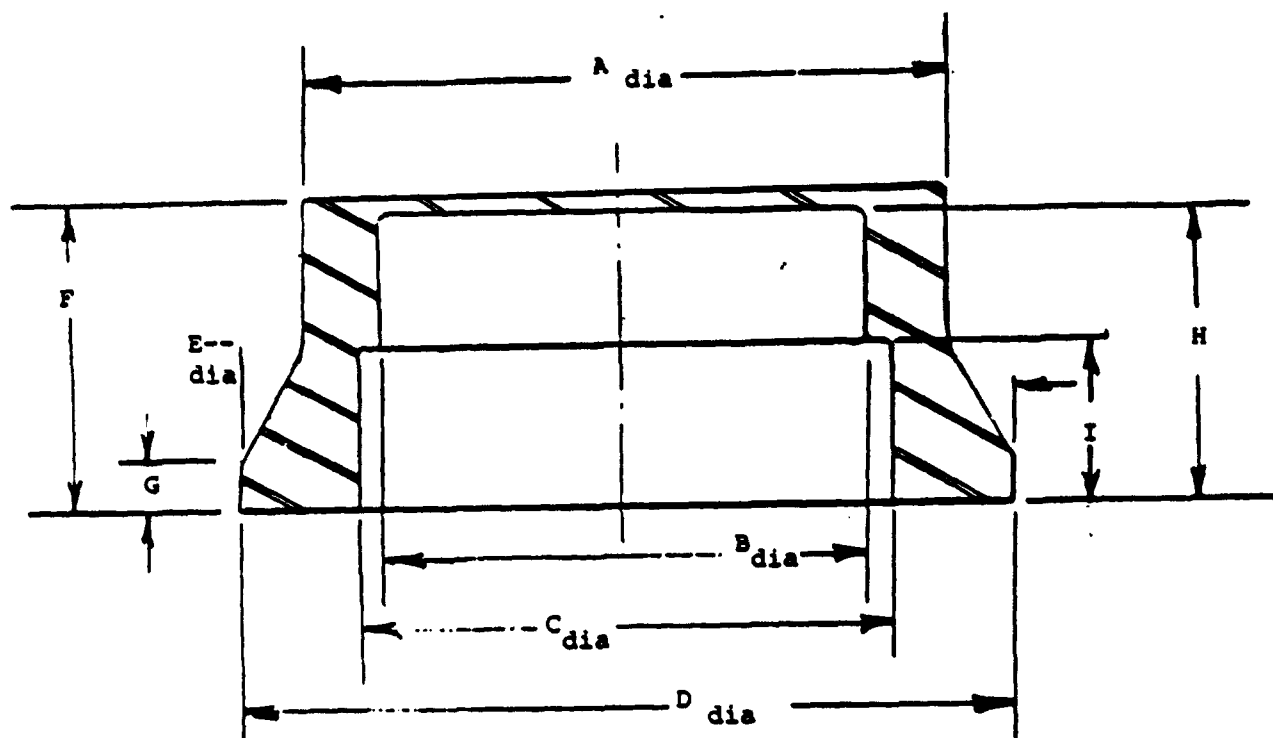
DESIGN OF PHASE I PREFORM FOR MANUFACTURE OF TURBINE ENGINE SUPPORT BEARING HOUSING OF FIGURE 1.
